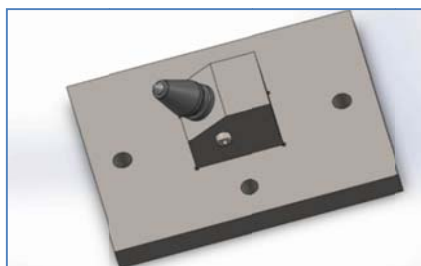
Design of conical tool holding unit that is mounted directly on the dynamometer
